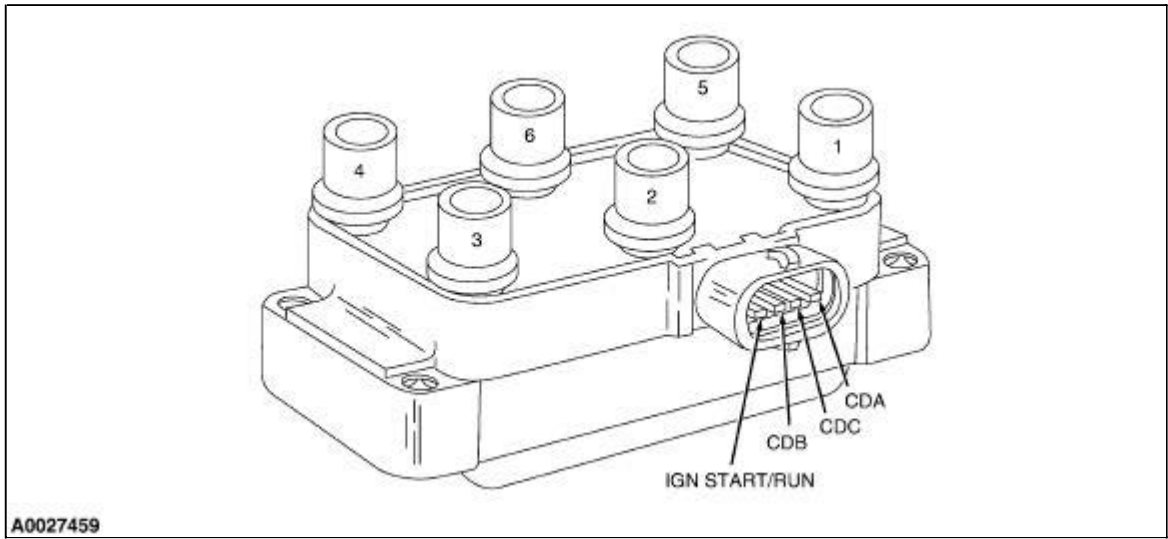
Horizontal Connector Six Tower Coil Pack for 4.0L Ranger, 4.0L Explorer Sport/Sport Trac and 4.0L Explorer/Mountaineer
